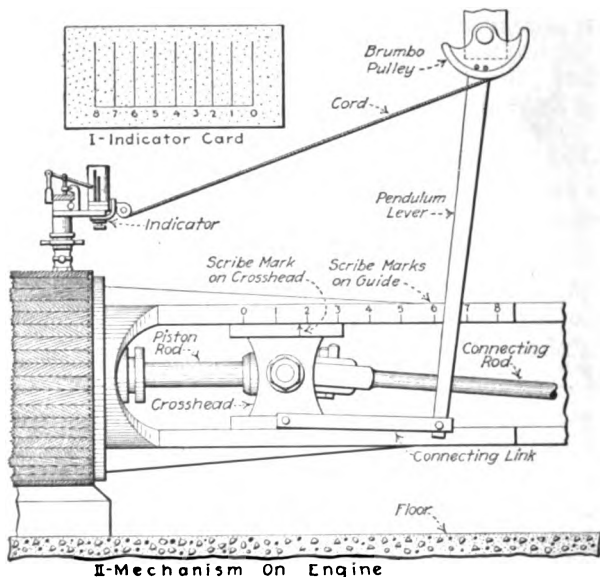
Method of testing reducing mechanism for accuracy of reduction.
